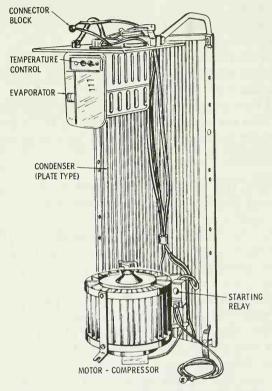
The assembly details of a modern electric refrigerator with a platetype condenser and a hermetically sealed motor-compressor unit.
